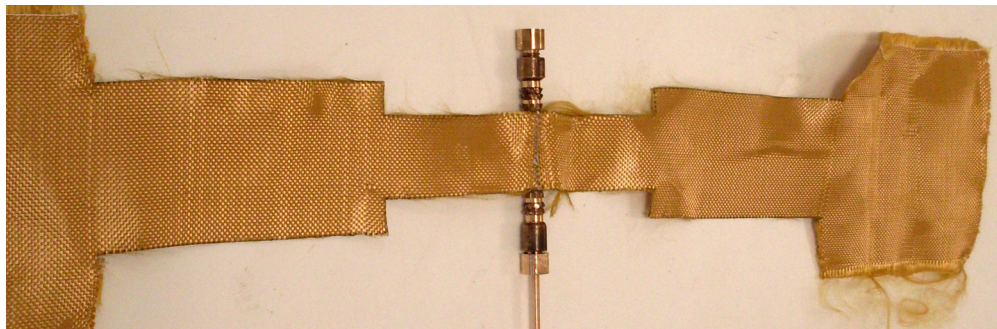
The two pieces of fabric are lined up on the winding fixture and glued at the lines of contact.
